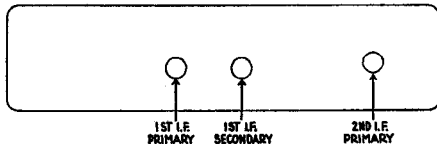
Rear of Model 19 Chassis, showing location of Compensating Condensers
